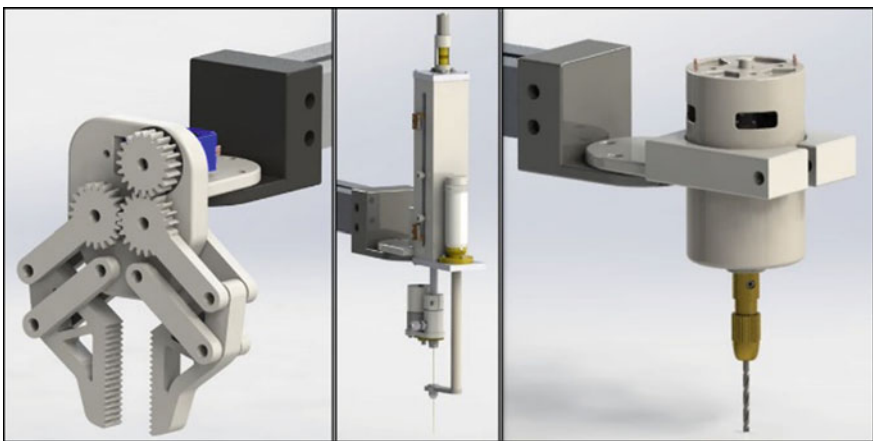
(1) Gripper attachment, (2) EDM attachment, (3) Drilling attachment
